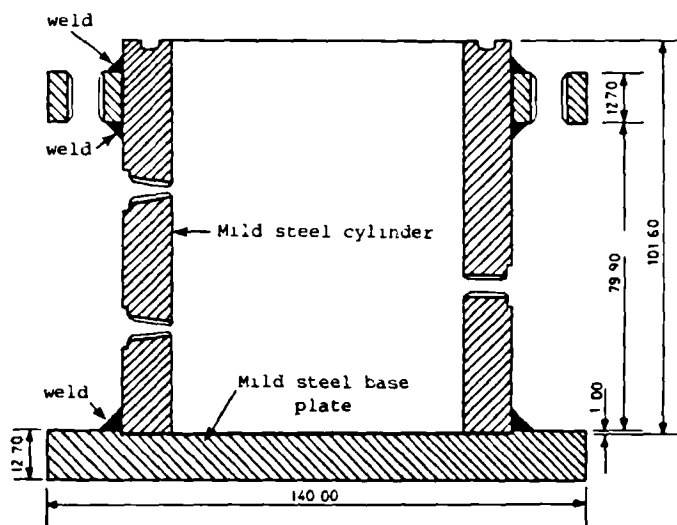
Base plate welded to mild steel cylinder.
